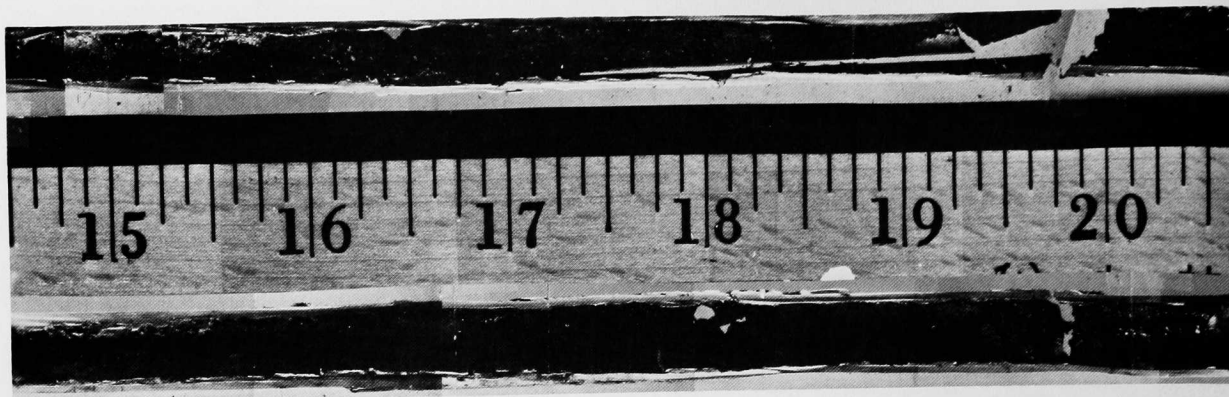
Inside Surfaces of Inner Wall, 15-20 in. from Bottom End Plug. Neg. No. MSD-168137.
